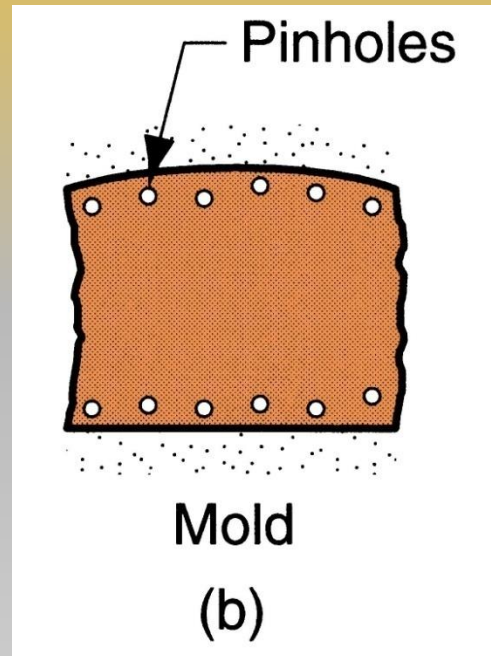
Common defects in sand castings: (b) pin holes
